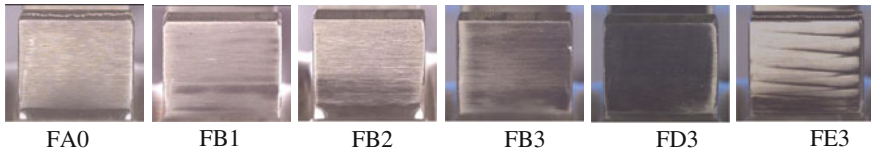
Tooth flanks after the etching process with different grades of grinding burn
